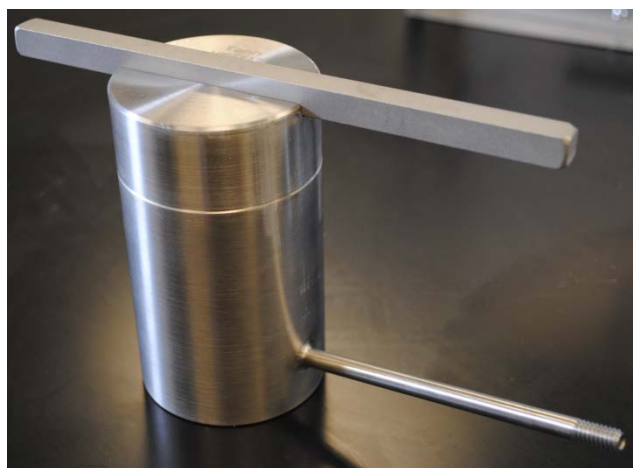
Retort Wrench to Separate Chamber Assembly
